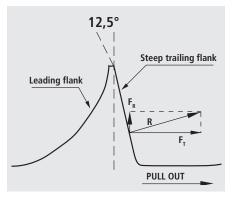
Asymmetrical thread form of the REMFORM® 'F' screw. The pressure flank minimizes radial stress  $F_R$  during thread forming and optimises pull-out resistance.
